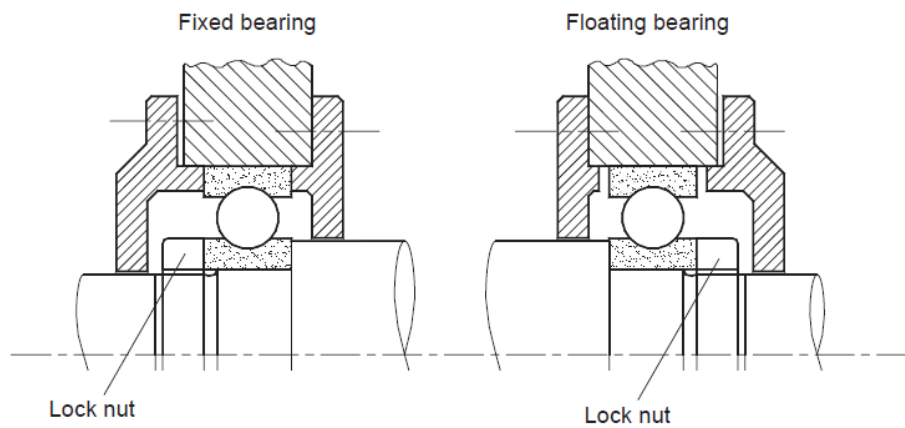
Basic bearing mounting using two deep groove ball bearing for a rotating horizontal shaft for moderate radial and axial loading.
